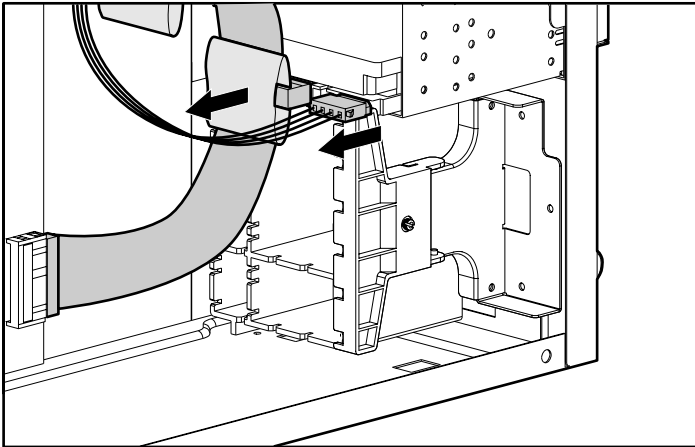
Disconnecting the hard drive cables (SCSI model)
